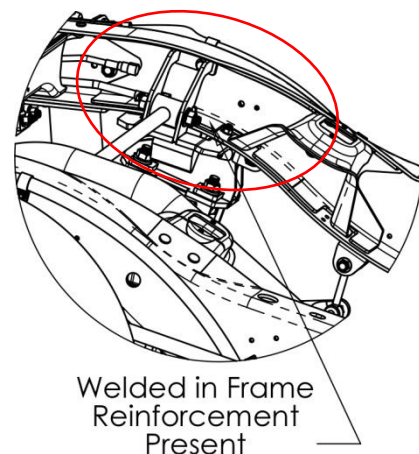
Frame with internal frame reinforcement. Do not add 10993-001.
